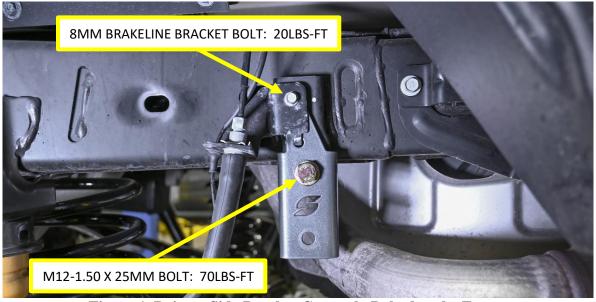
Drivers Side Bracket Correctly Bolted to the Frame
